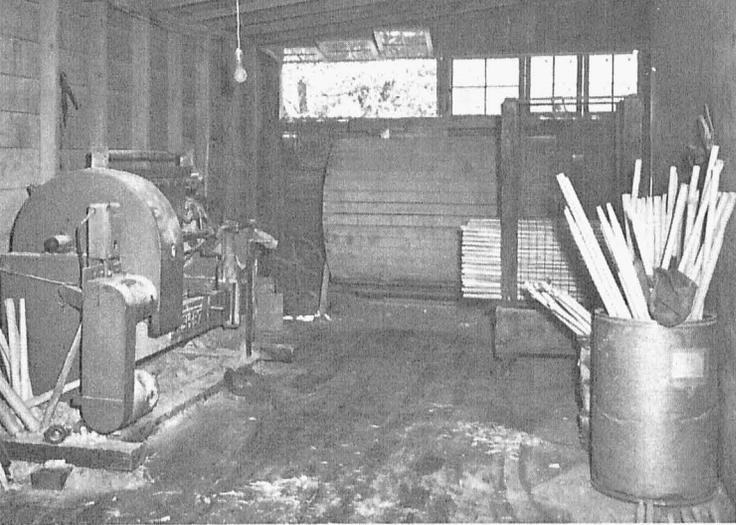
In the background is a "tumbling" machine which imparts a smooth finish on lacquered handles much the same way one would handrub a wood finish.
